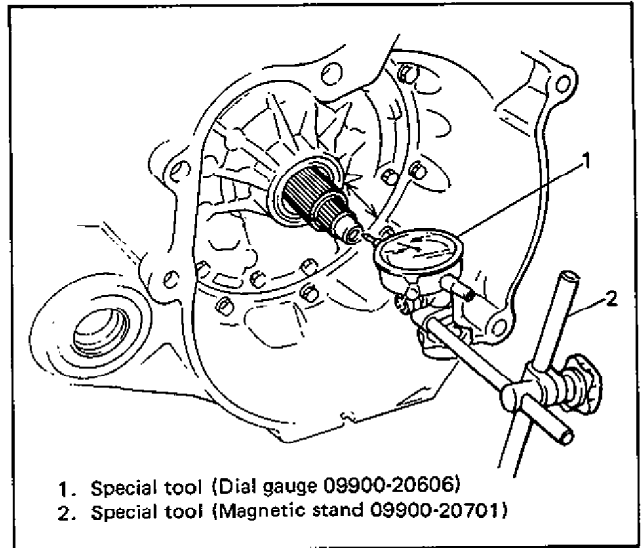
B-223 Measuring Thrust Play of Input Shaft
